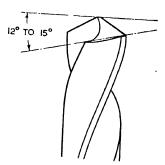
SETTING UP DRILLS Correct clearance behind cutting edges.
